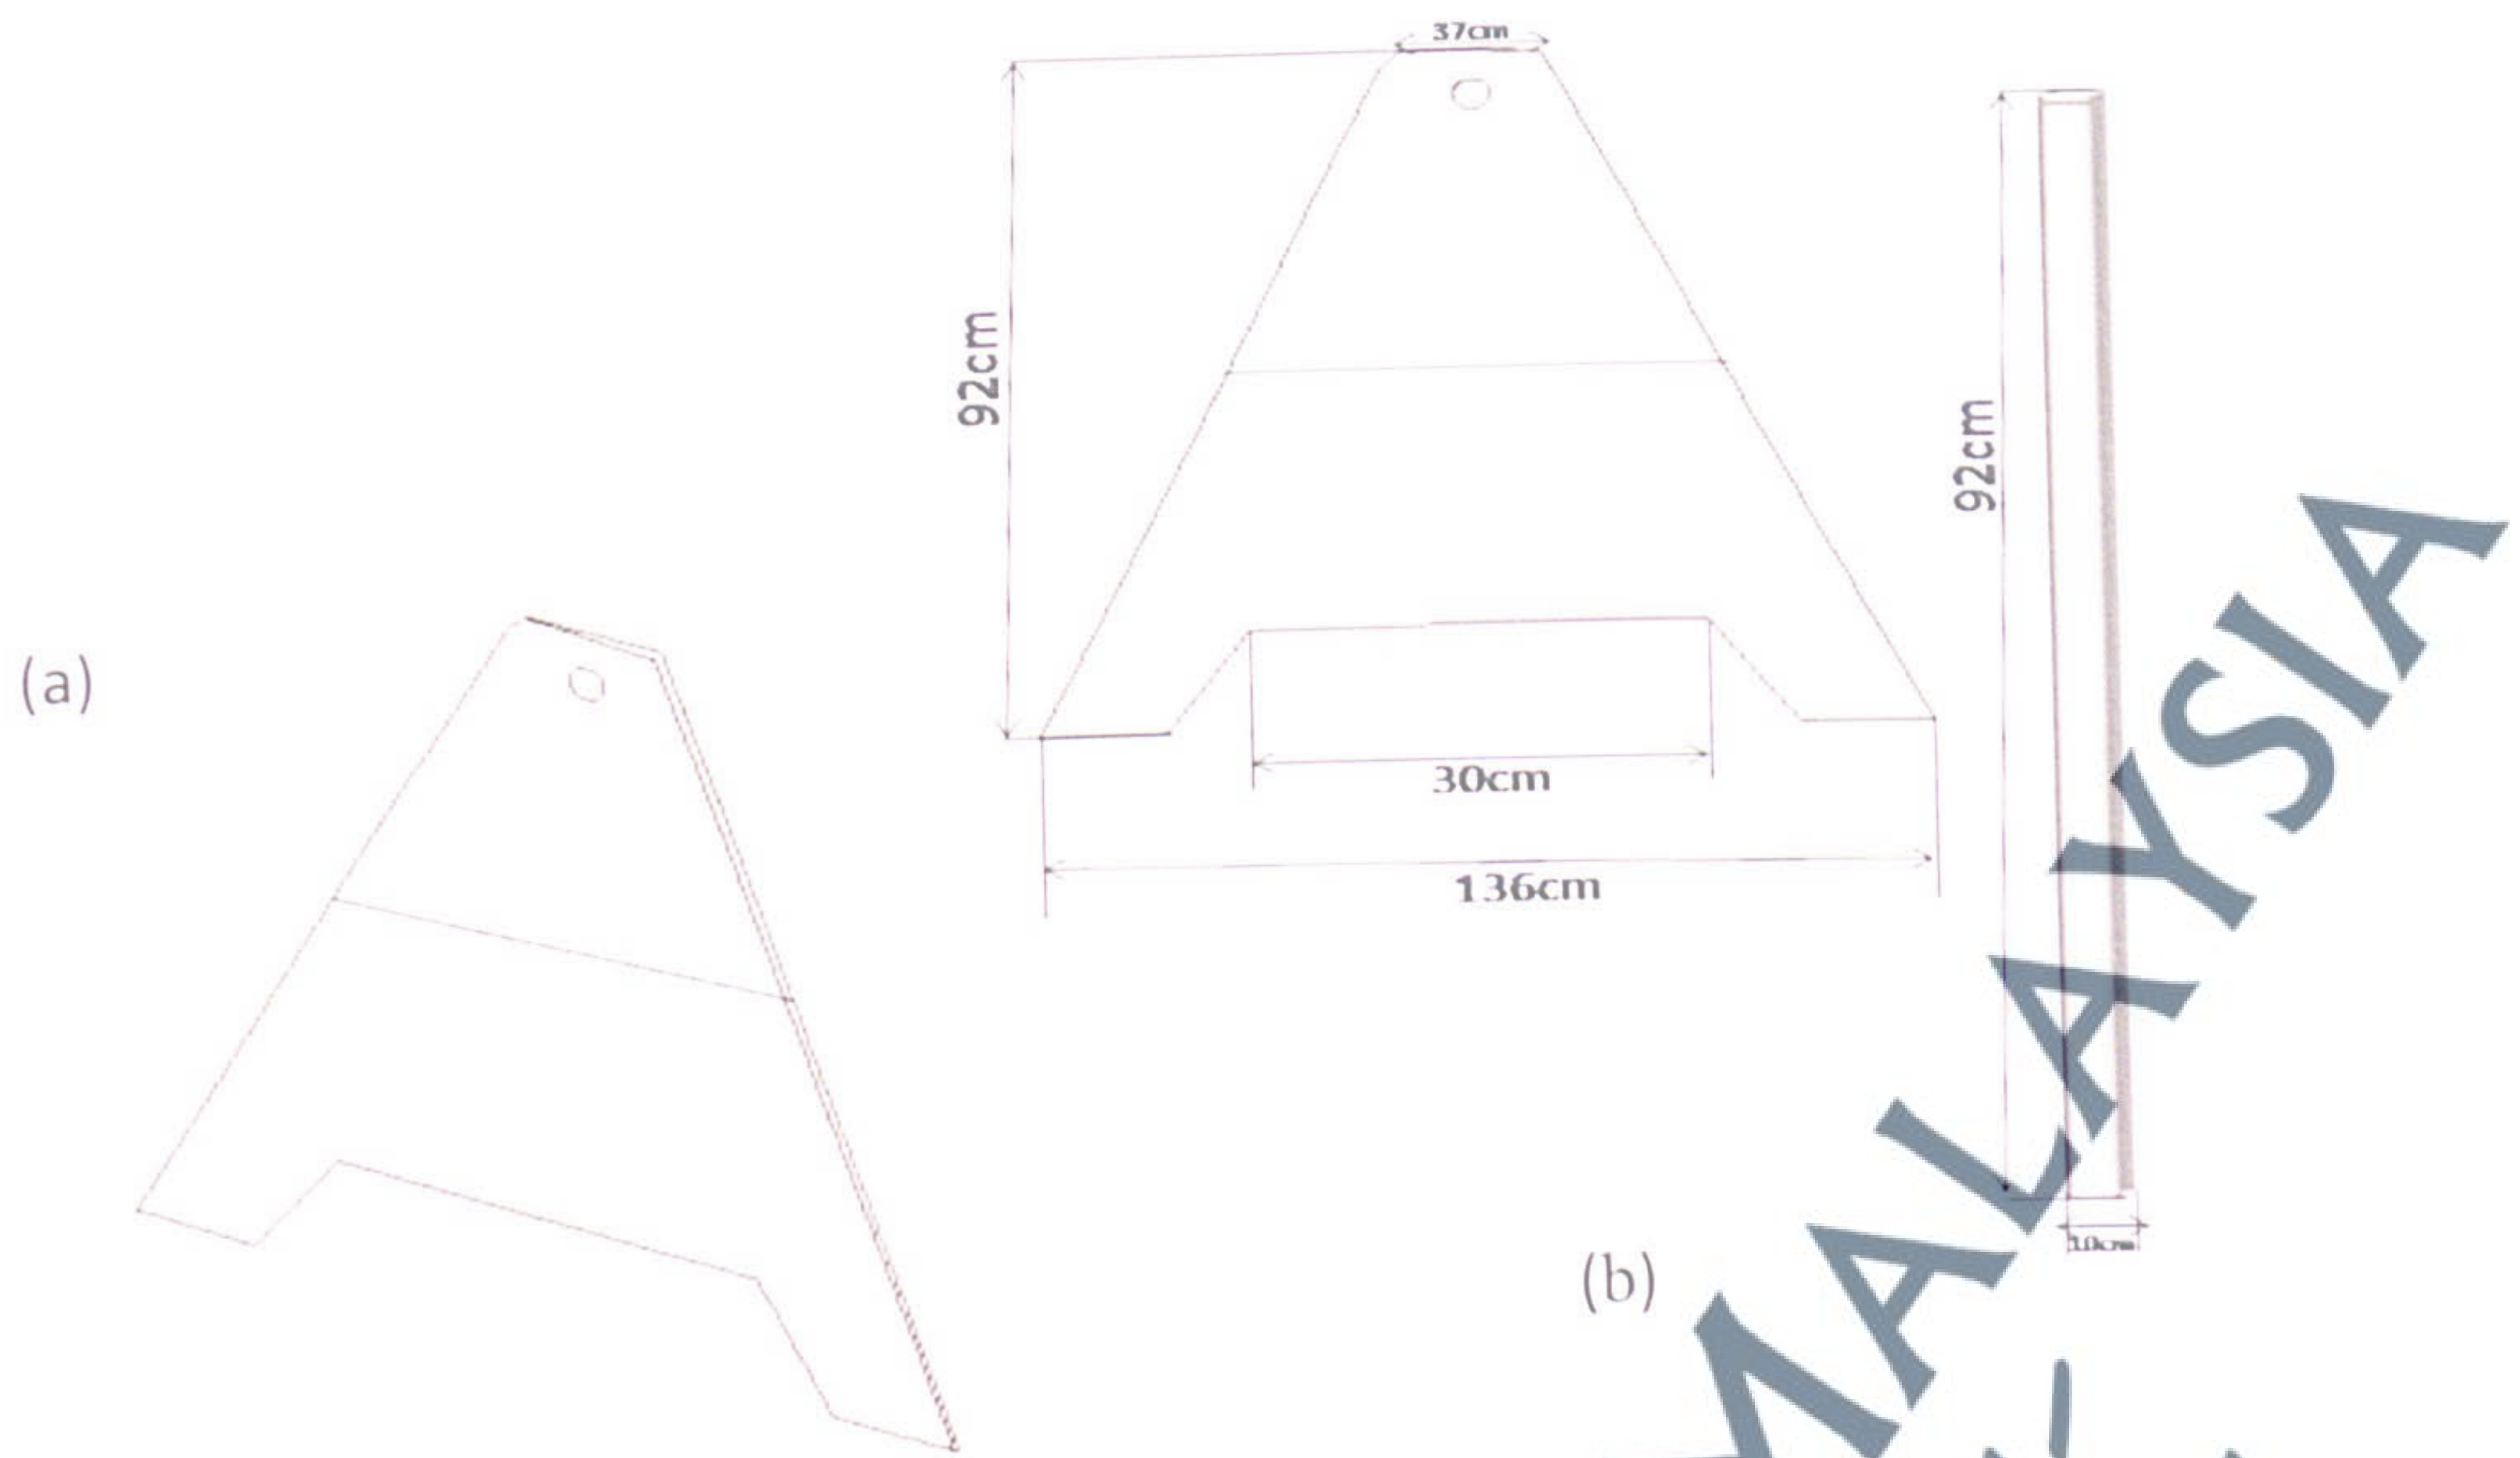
(a) Designed and Dimension of PTC Stand Structure and, (b) Dimension of Tube Receiver.
